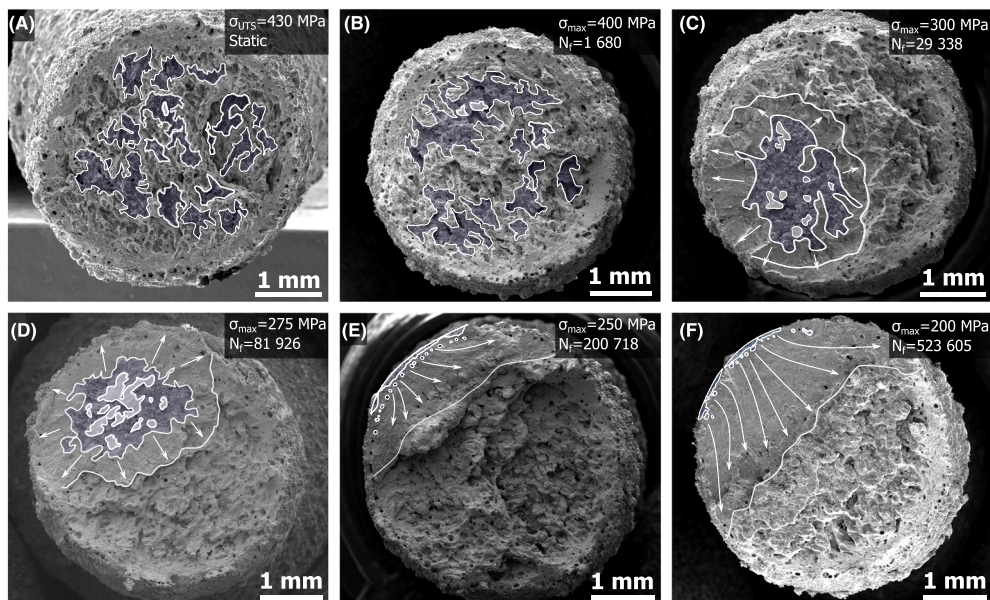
Fracture surfaces at different load levels: A, static; B, below HCF; C and D, internal defects and upper part of HCF; E and F, surface defects and lower part of HCF [Colour figure can be viewed at wileyonlinelibrary.com]
